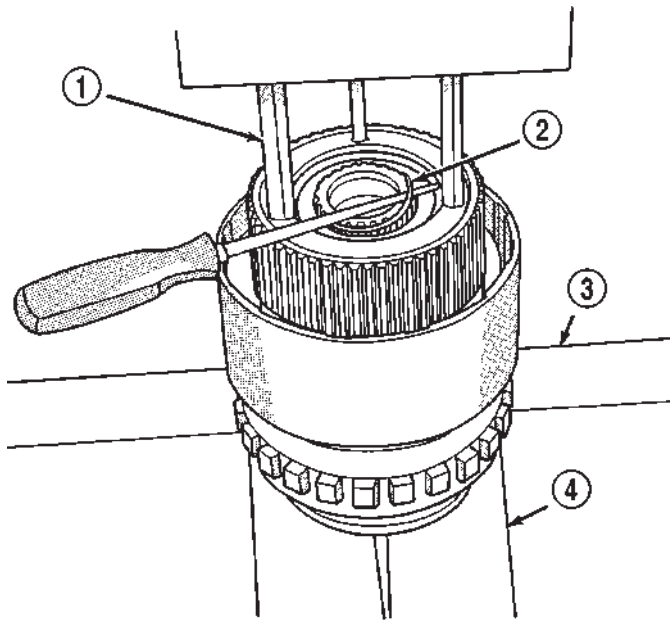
Direct Clutch Pack Snap-Ring Removal
